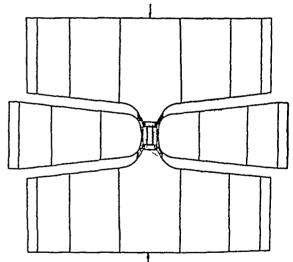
The belt', ultra-high-pressure, high-temperature assembly
